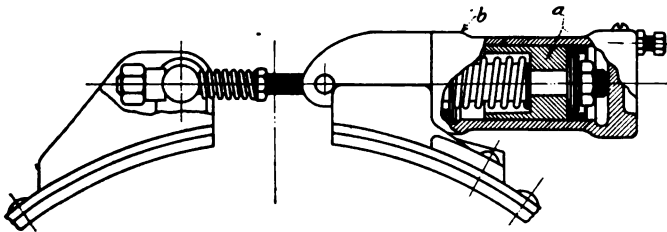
CONSTRUCTION OF THE BAND MECHANISM EMPLOYED ON A HYDRAULIC BRAKE
